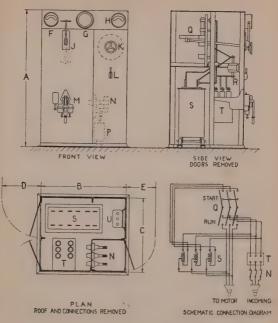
Typical D.C. Contactor Equipment for Reversing Heavy Duty Motor.
